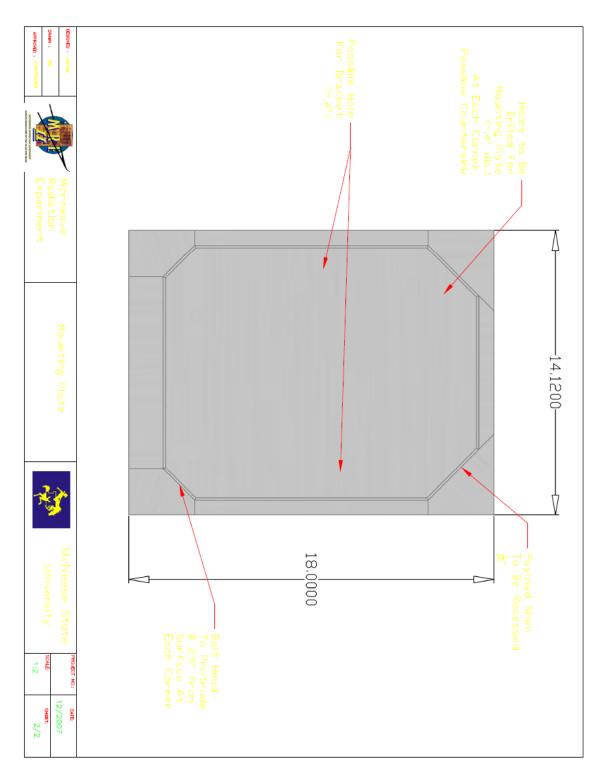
The mounting plate modifications to which attach the box illustrated in Figure 1.
